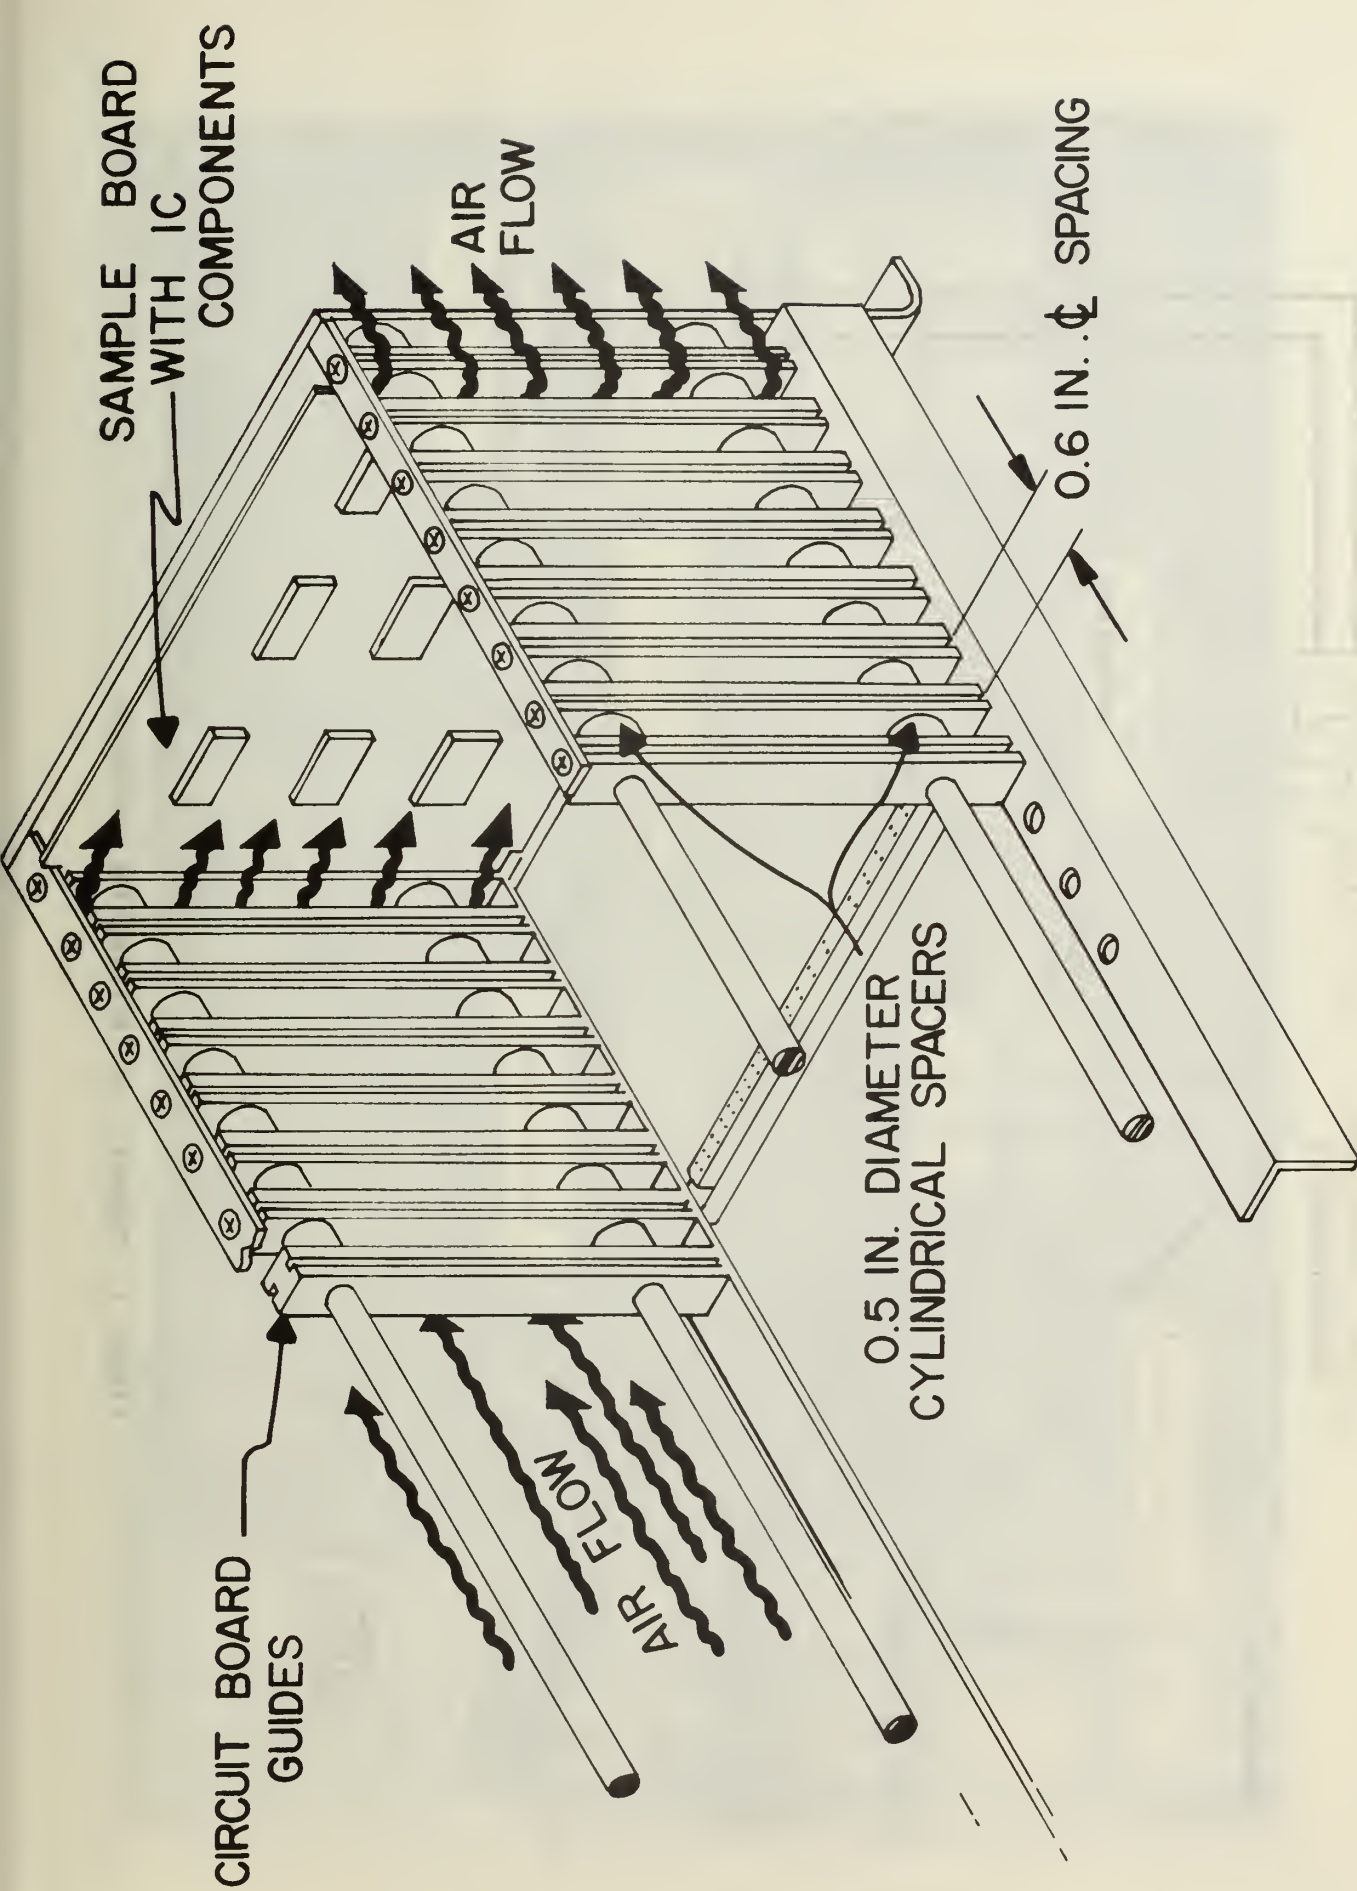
PARTIAL ASSEMBLY OF MODULAR CIRCUIT BOARD CAGE
